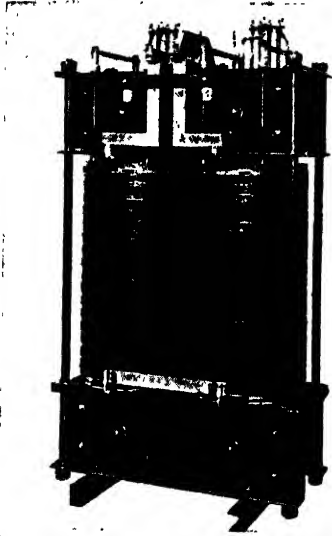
Shell type transformer during assembly. The laminated construction is clearly shown.
